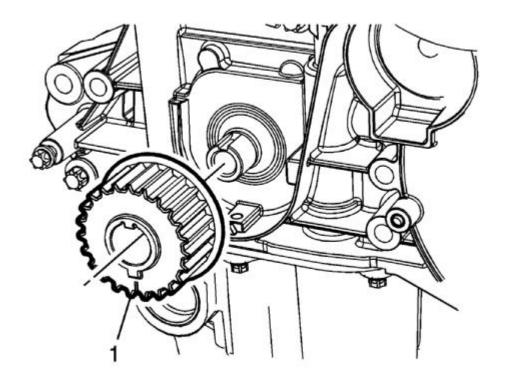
Crankshaft Sprocket Courtesy of GENERAL MOTORS COMPANY
